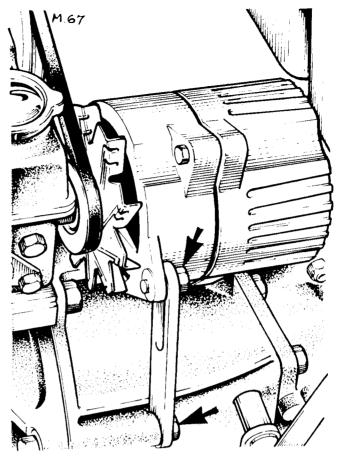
ALTERNATOR ADJUSTING SCREWS.
